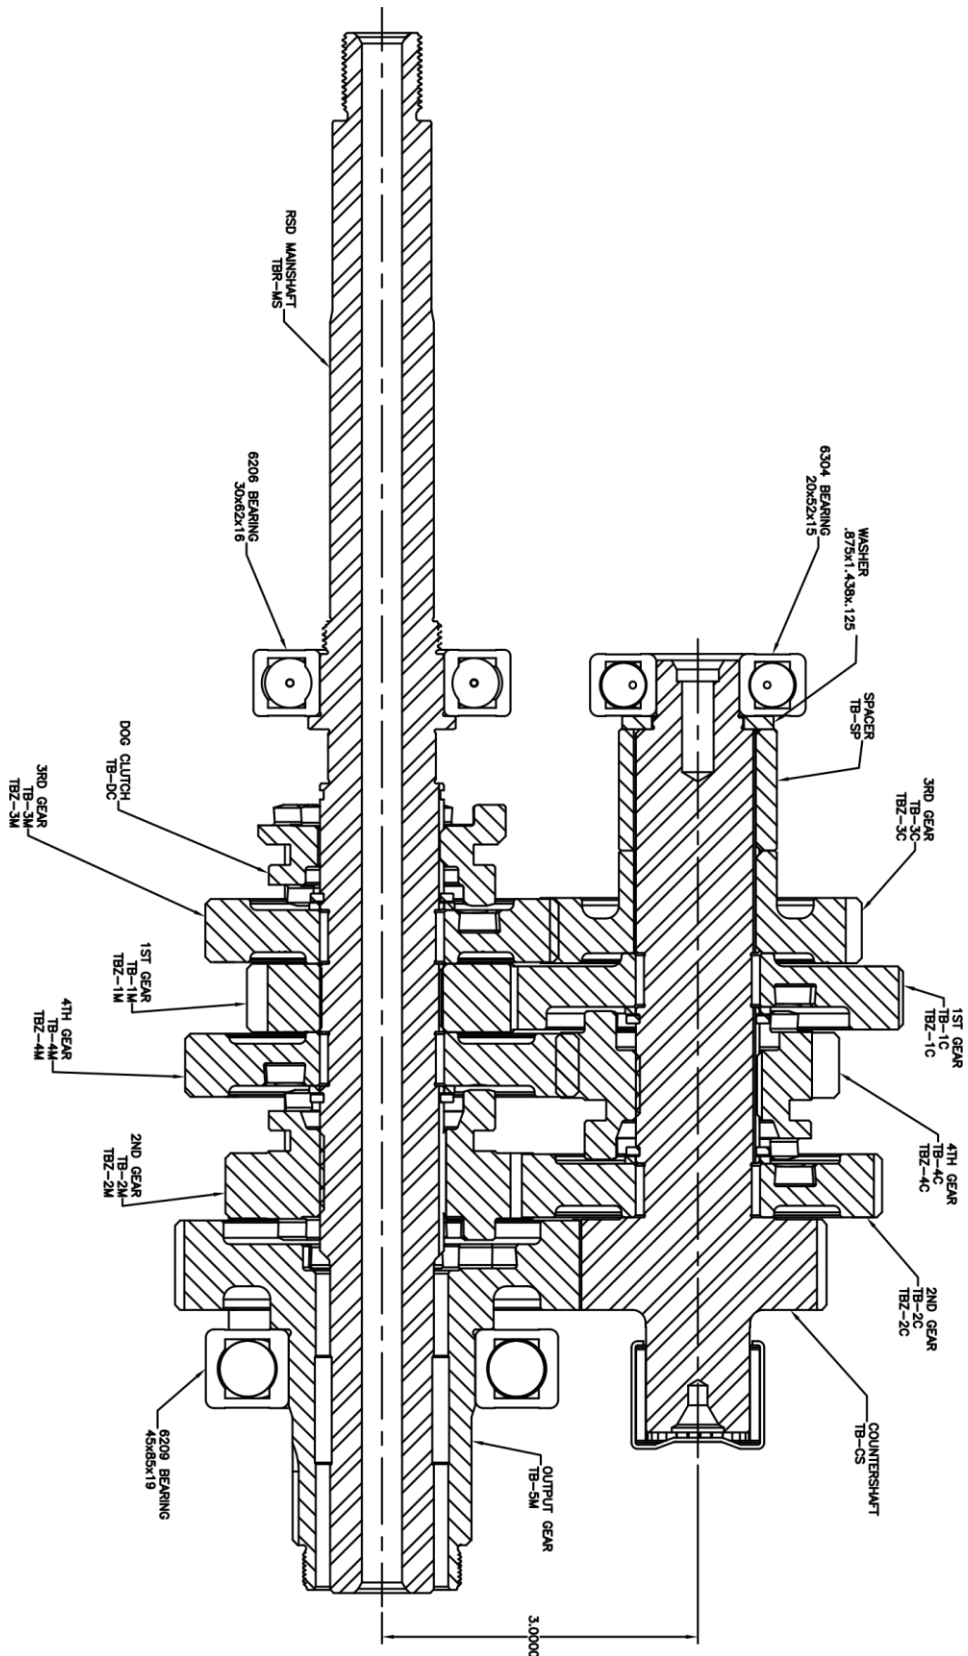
| GEARSET LAYOUT, TORQUEBOX 5-SPEED RIGHT SIDE DRIVE (RSD)
